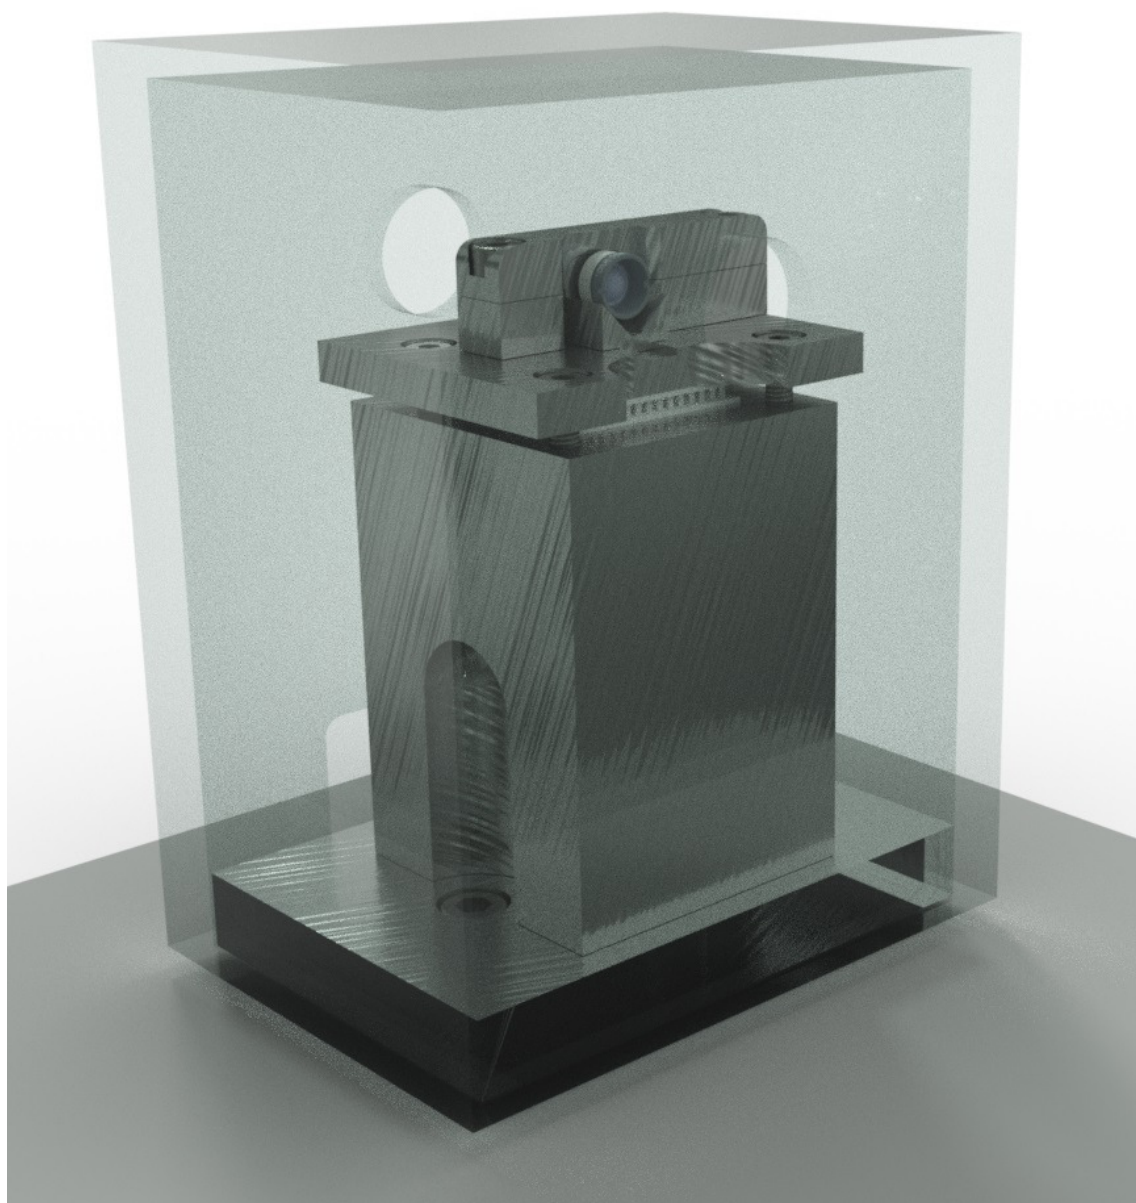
Assembled tapered amplifier mount with acrylic dust cover. Note the two holes in the cover to provide optical access for the input and output beams - these should ideally be fitted with AR-coated windows.
